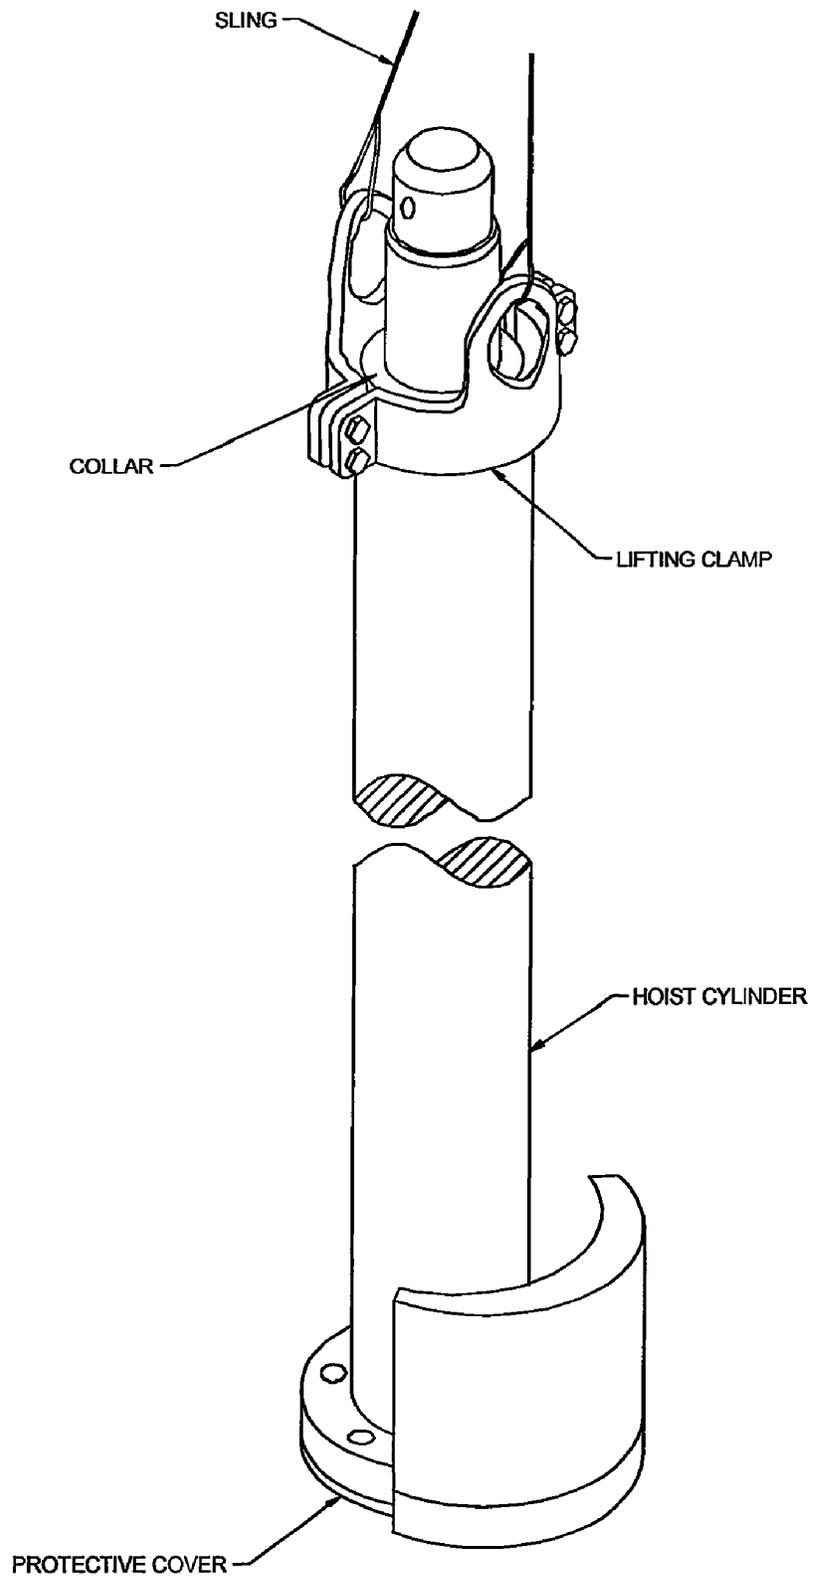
Installation of Hoist Cylinder Lifting Clamp (Assy 298)
